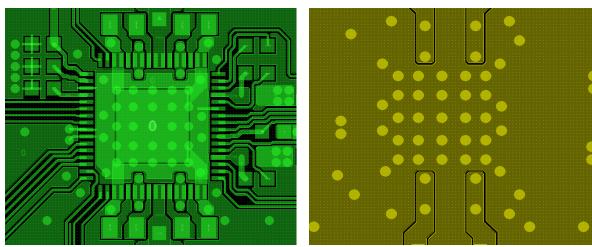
Example of 2-layer PCB layout, top and bottom layers
